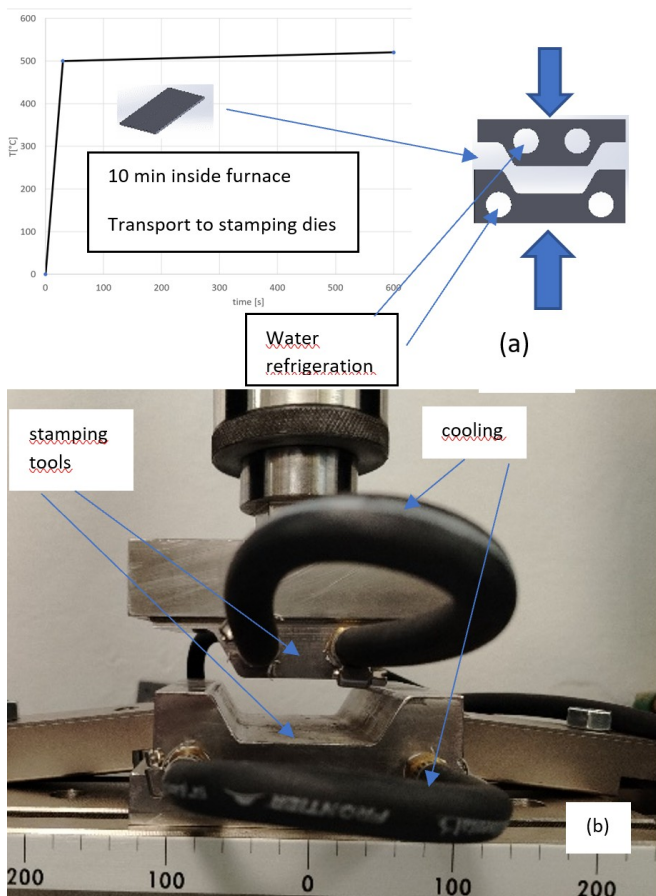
Heat treatment of 10 min and stamping of sample in water-cooled tooling (a), and stainless-steel tooling mounted in a tension-compression machine to produce warm stamping (b).
